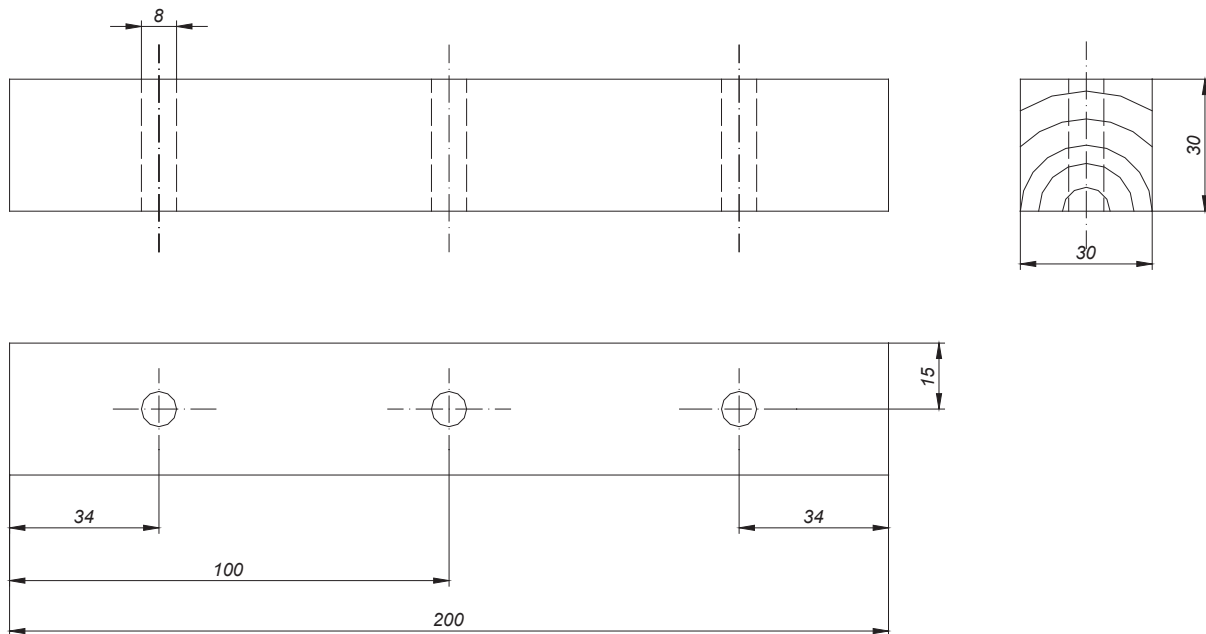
Specimen (base) for welding dowels perpendicular to grain
